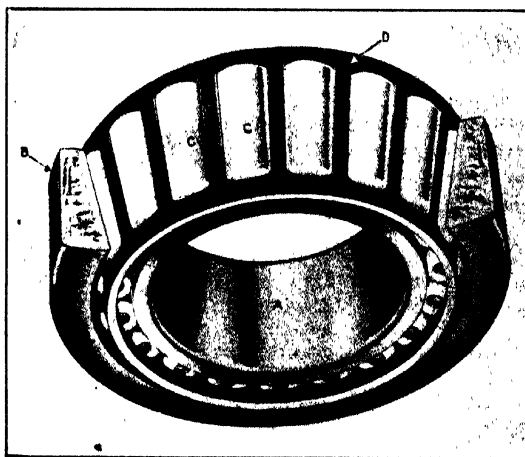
ASSEMBLY OF TIMKEN ROLLER BEARING
